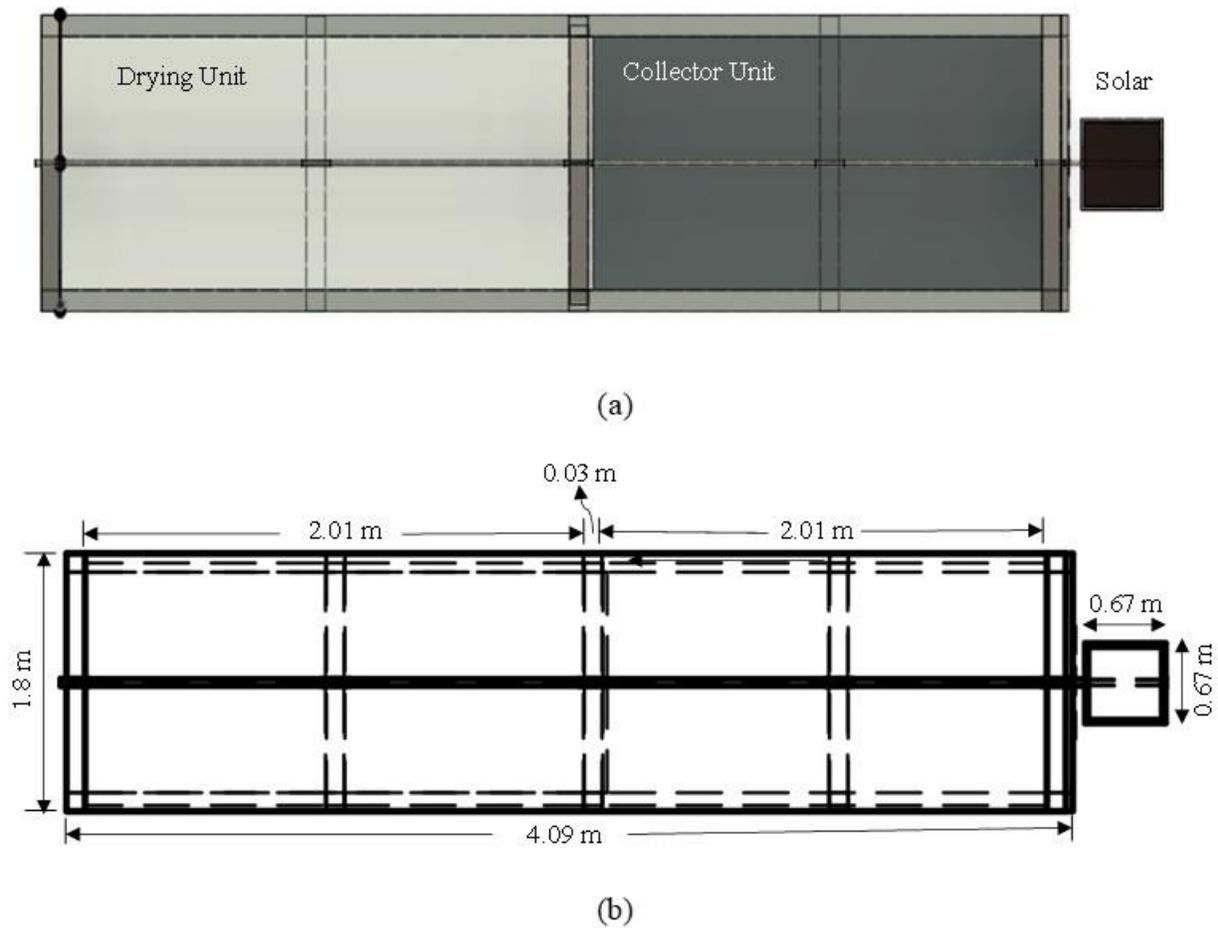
Solar Tunnel Dryer 3-D Design View, (a) Top view and (b) Top view with dimensions in mm
